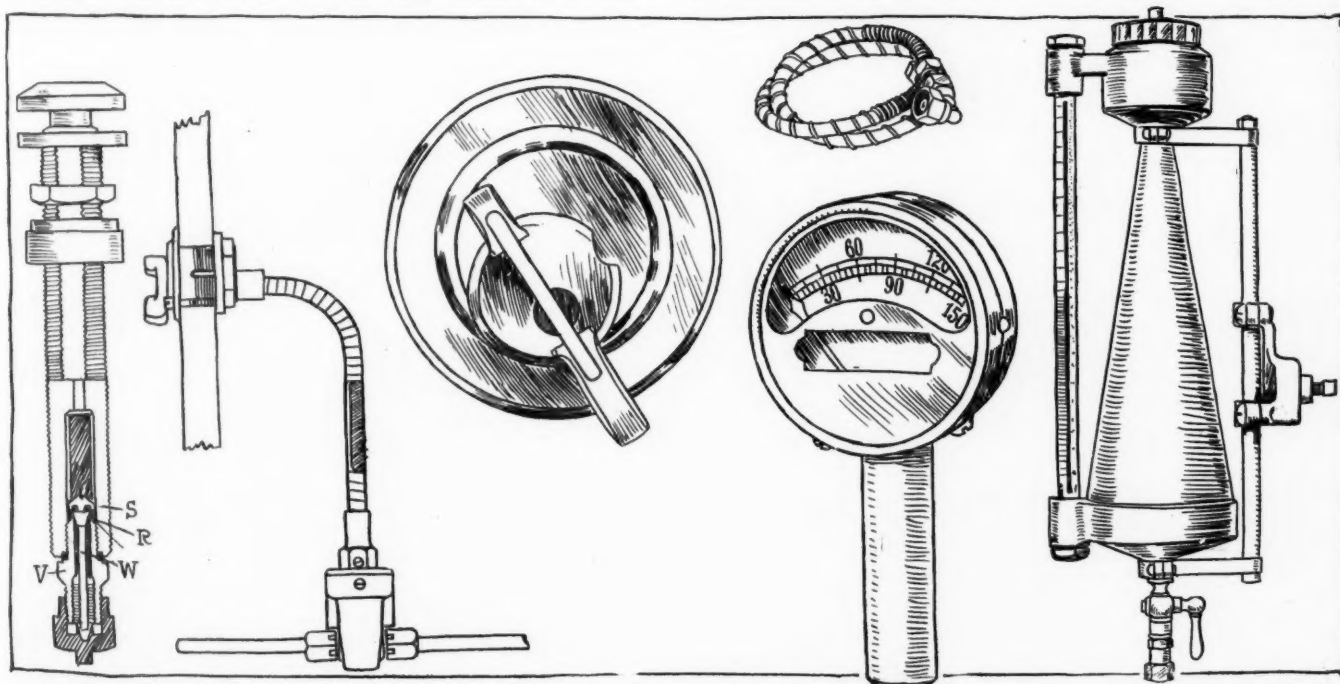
Burke tire valve. Figs. 8 and 9—Crary fuel lock. Fig. 10—Azadian tire gauge. Fig. 11—Holley fuel consumption indicator
